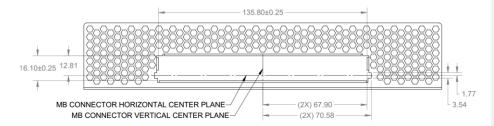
Large Form Factor Baseboard Chassis CTF Dimensions (Side View)
